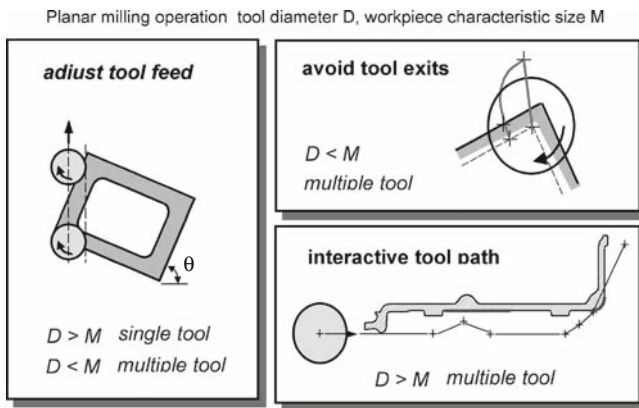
Tool path strategies for minimizing and preventing burrs in face milling
